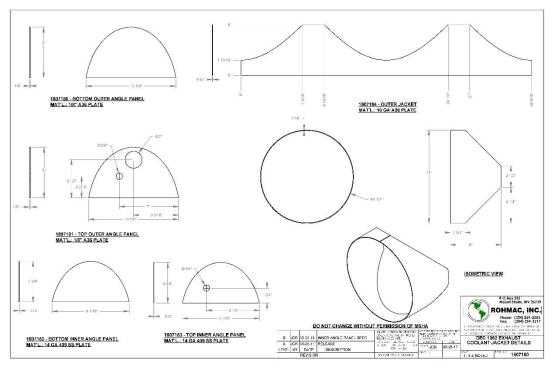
Revised Diesel Power Package Exhaust Coolant Jacket Detail Drawing
